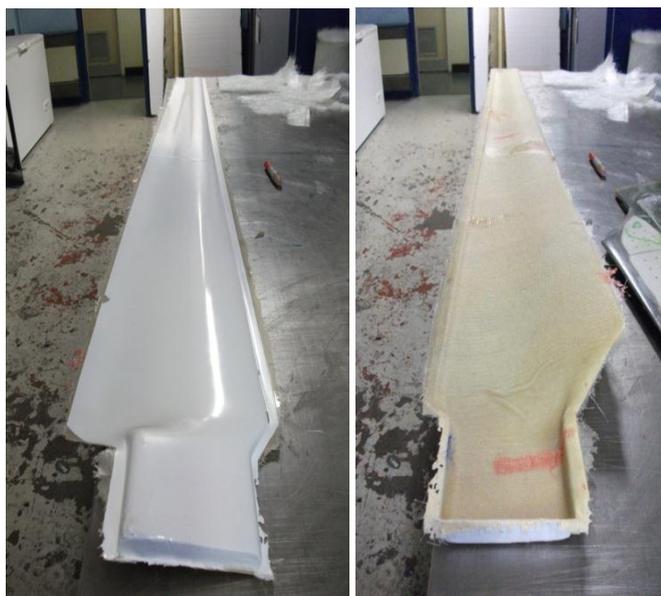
(a) Blade skin mould face, (b) Blade skin vacuum bag face
